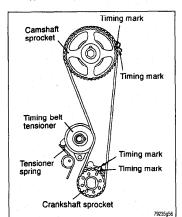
Align the timing belt sprockets as indicated before removing the timing belt-1995-00 1.5L engine
